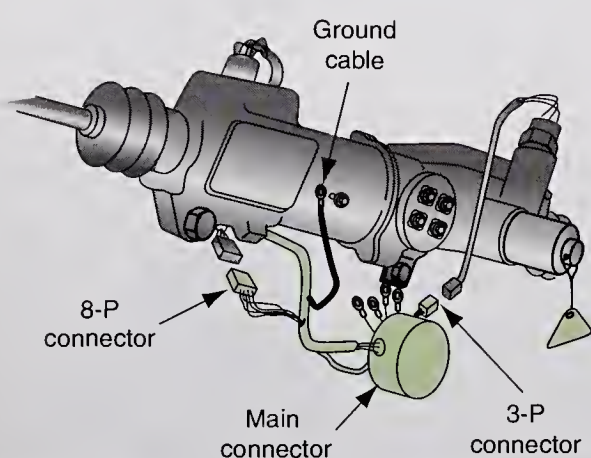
Removing the ground cable connector and all wiring harness connectors on the rear steering actuator.
